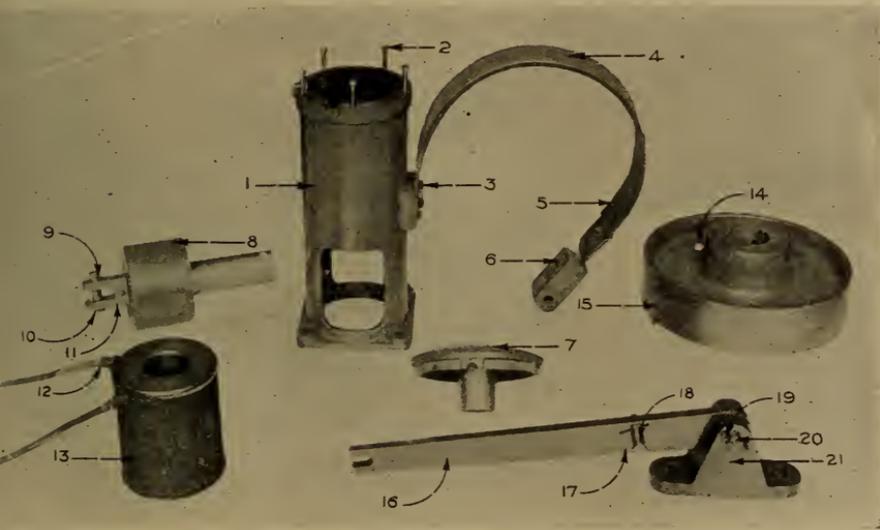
CB-17 Motor. Gen. Elec. Co. Detailed Parts of Band Brake.
